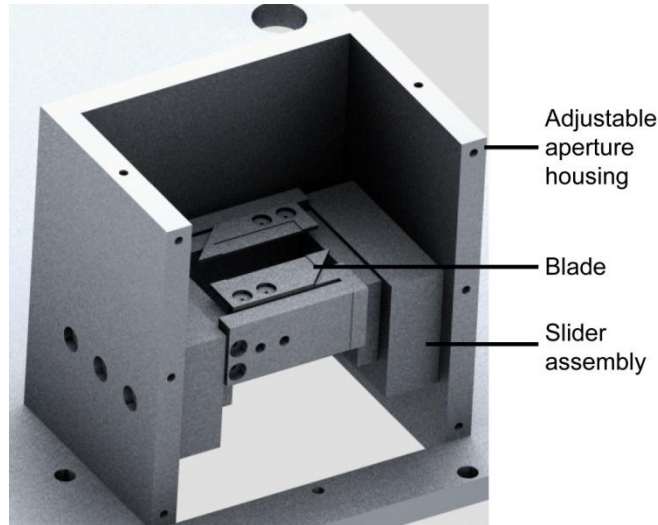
Mechanism for adjustment of field of view in the new dual-color setup: A cut-away view shows that the aperture comprises of two blades, the positions of which can be independently adjusted through slider assemblies
